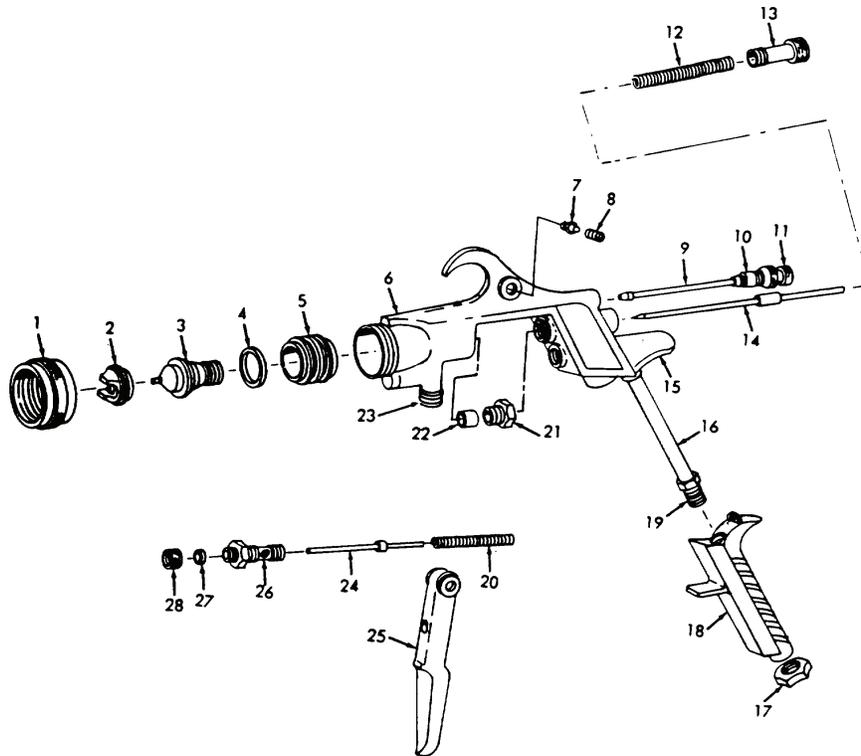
Removable Spray-Head Type Spray Gun, Exploded View
